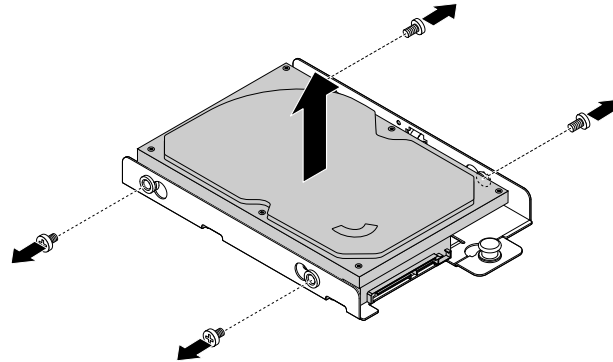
Removing the 3.5-inch hard disk drive from the bracket
